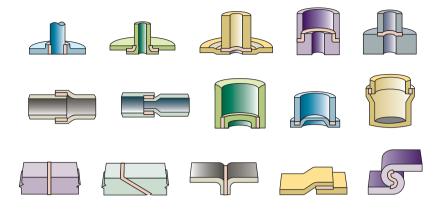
Joint designs commonly used in brazing operations. The clearance between the two parts being brazed is an important factor in joint strength. If the clearance is too small, the molten braze metal will not fully penetrate the interface; if it is too large, there will be insufficient capillary action for the metal to fill the interface.
